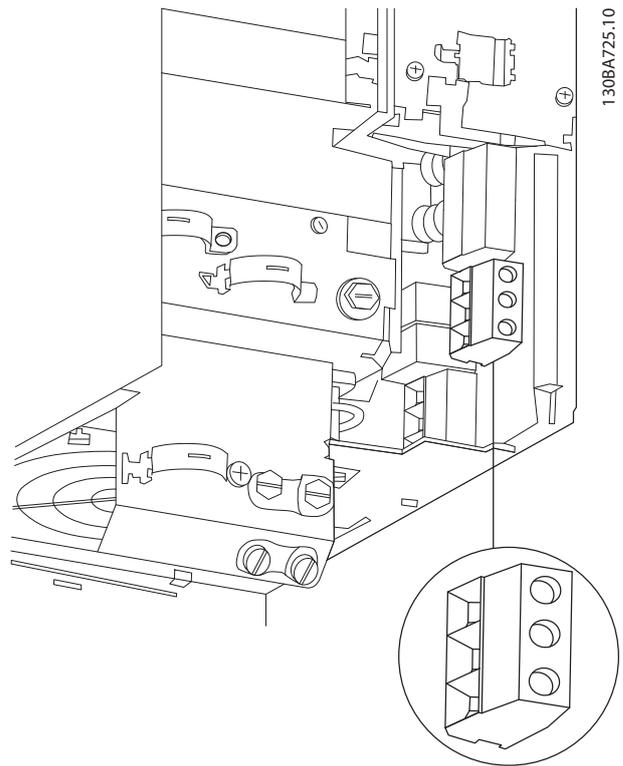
When mounting cables, first mount and tighten earth cable
